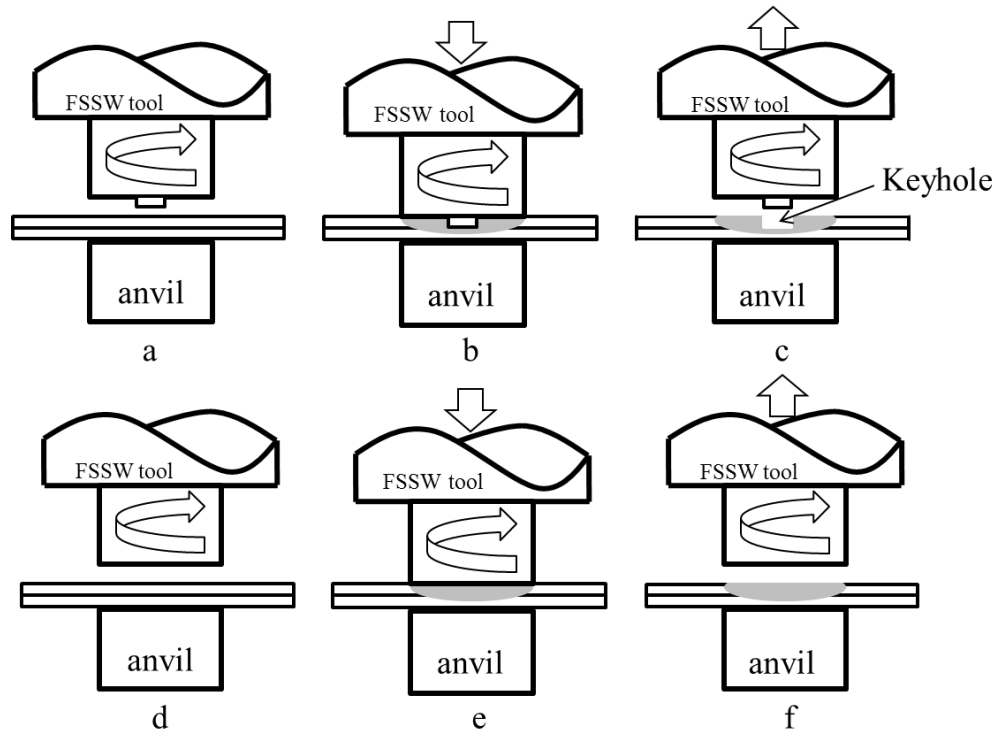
The Friction Stir Spot Welding Process. A-C: represents the traditional FSSW process using a tool with a pin. The resulting keyhole defect is illustrated. D-F: represents the FSSW process using a pinless tool. The lack of the keyhole defect is illustrated.
